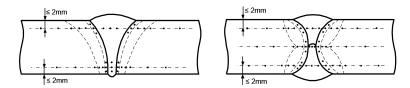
Example of arrangement of hardness test points for butt weld
